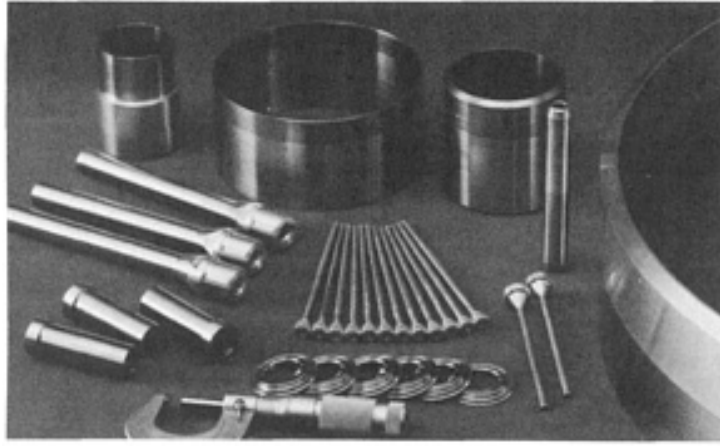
TUBULAR WELDING TRANSITION JOINTS FOR HERMETIC WELDS BETWEEN TITANIUM, ALUMINUM, AND ZIRCONIUM AND STAINLESS STEEL
